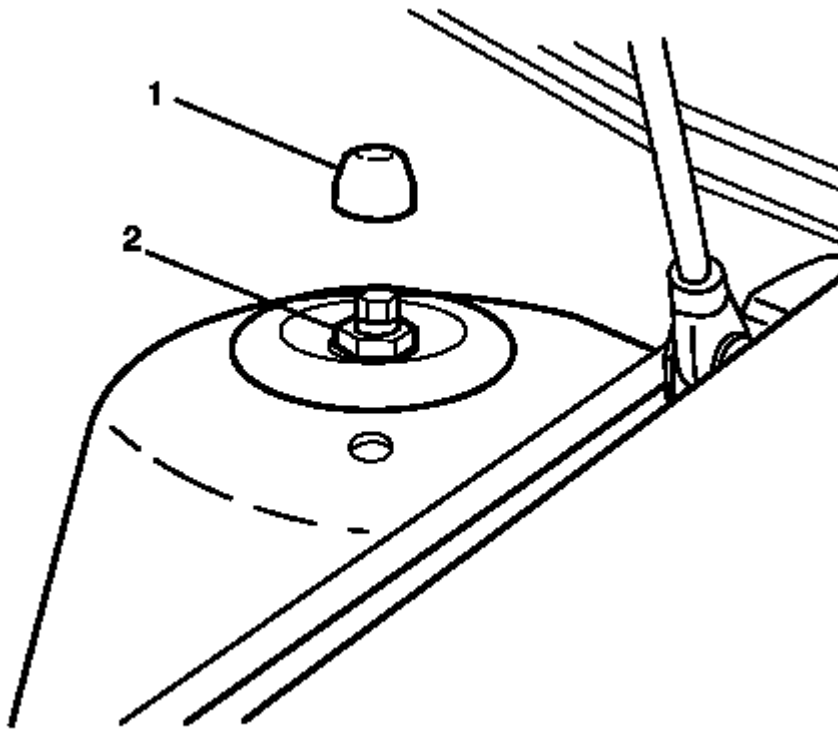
Identifying Front Strut Assembly To Front Wheelhouse Retaining Nut With Dust Cover
